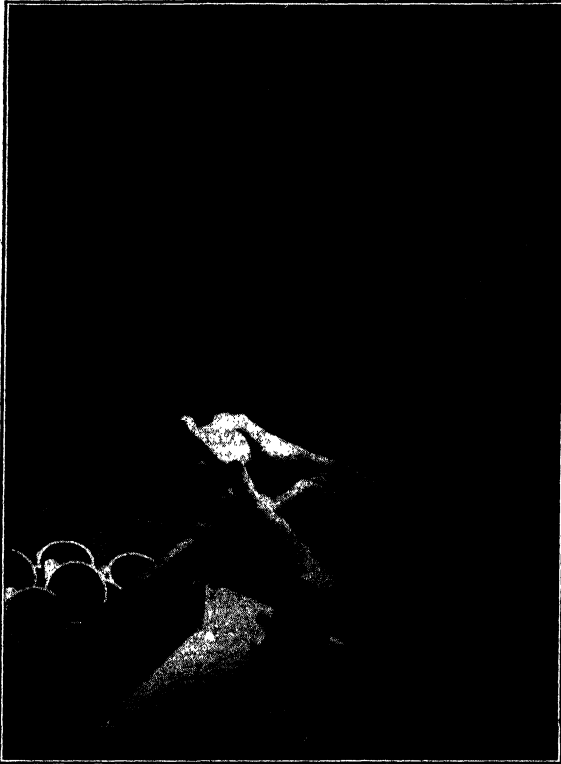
The castings that pass visual and dimensional inspection are subjected to Zyglo inspection. This is a penetrative oil test which, under black light, reveals cracks or other surface imperfections by a fluorescent effect. (Courtesy of Haynes Stellite Co., Kokomo, Ind.)
